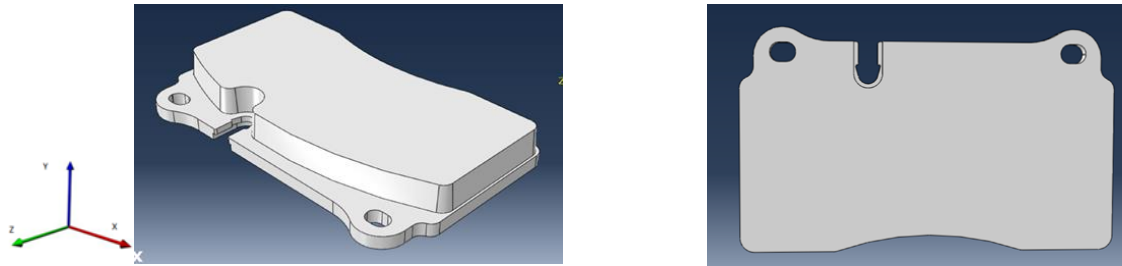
The 3D model of assembled brake pad-A in different schematic views.
